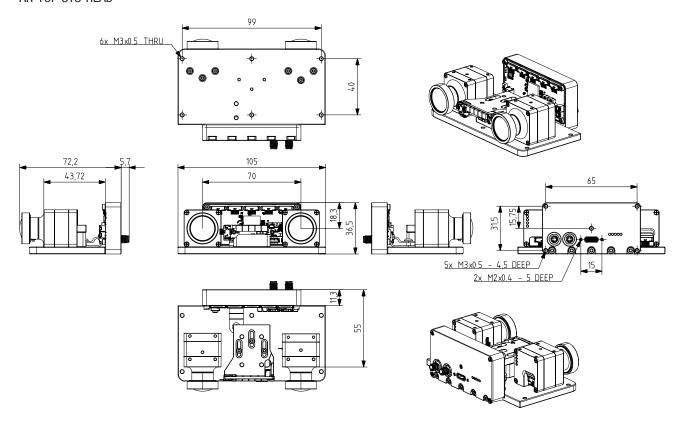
Dimensioanl drawings of AR-TOF-SYS-HEAD
